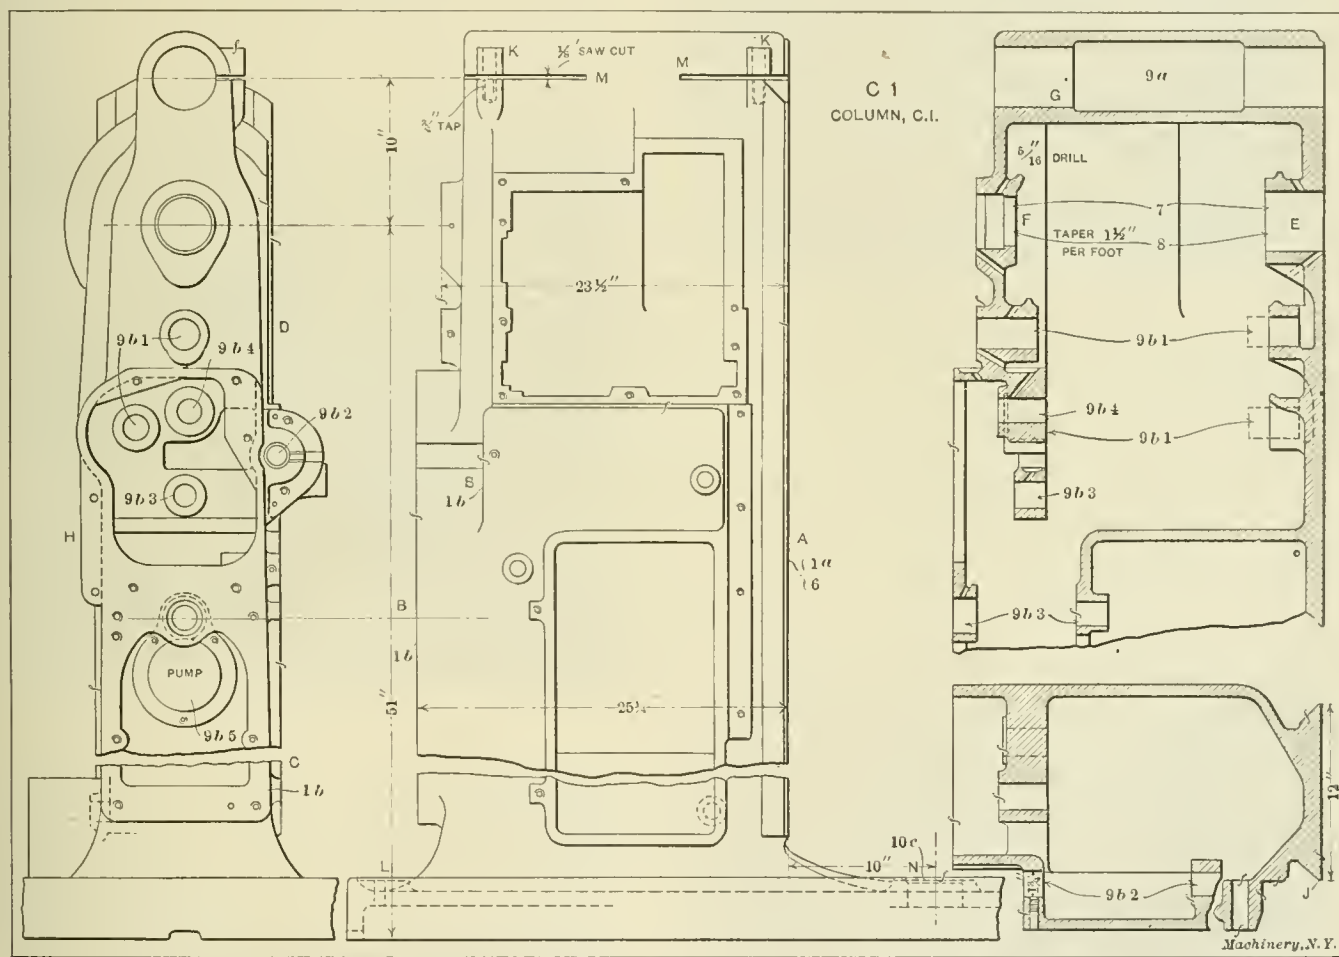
Drawing locating the Machining Operations Listed in the Operation Sheet on the Next Page
